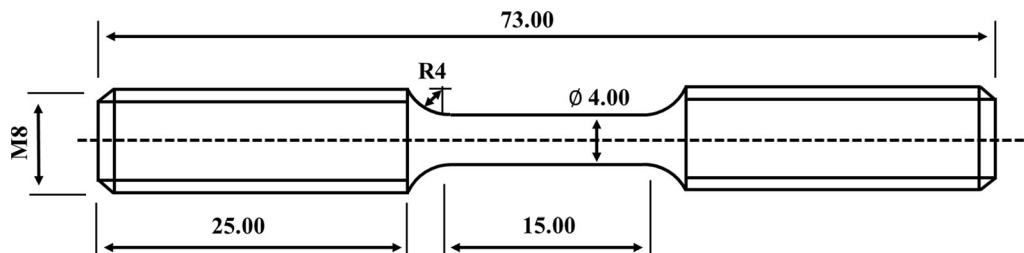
Specimen geometry for tension–compression test with dimensional units in mm.
